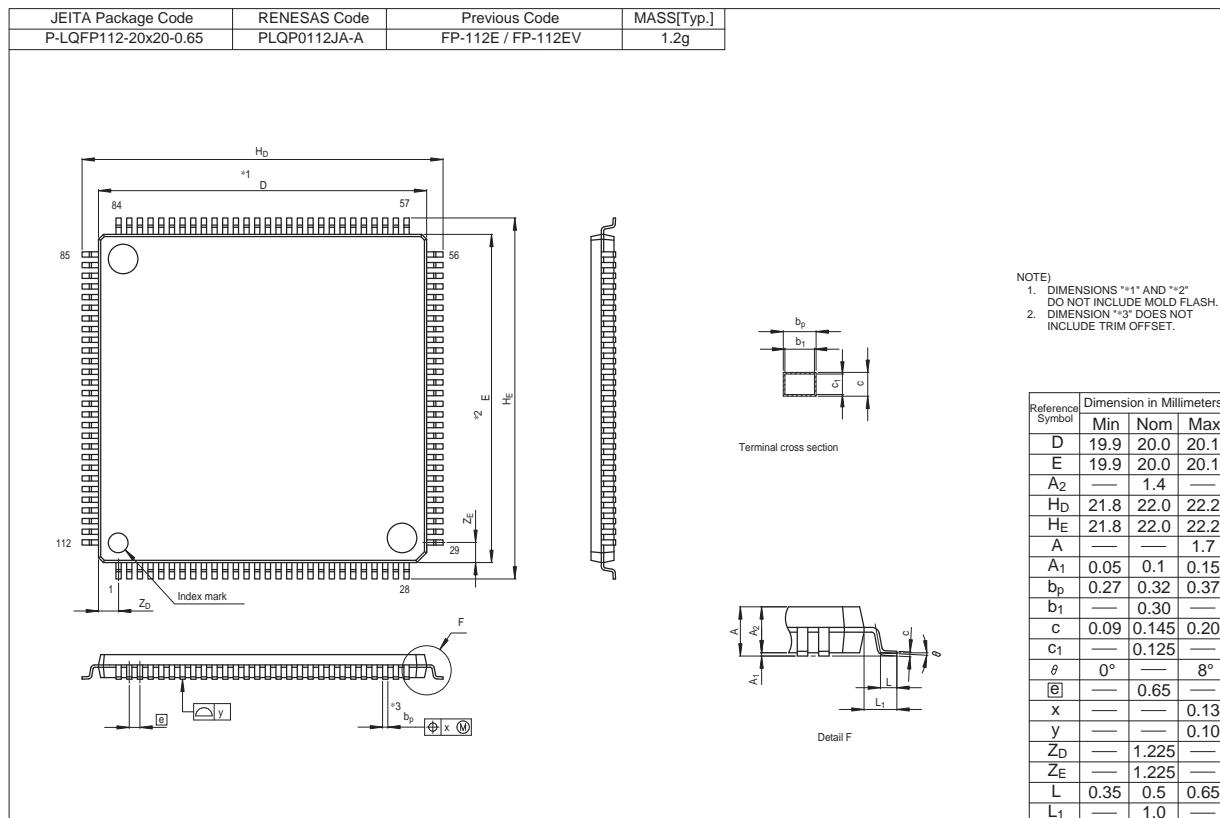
Pin LQFP (PLQP0112JA-A) Package Dimensions
